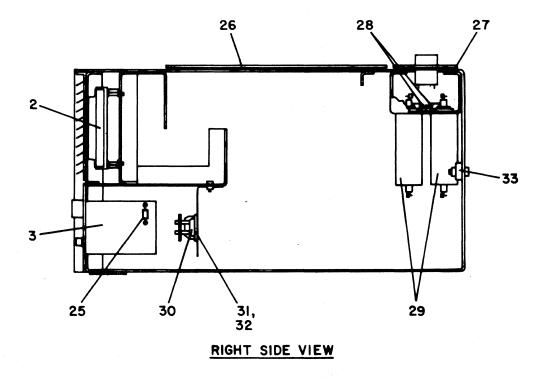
4 TAPE TOP HAT ASSEMBLY (A2)
